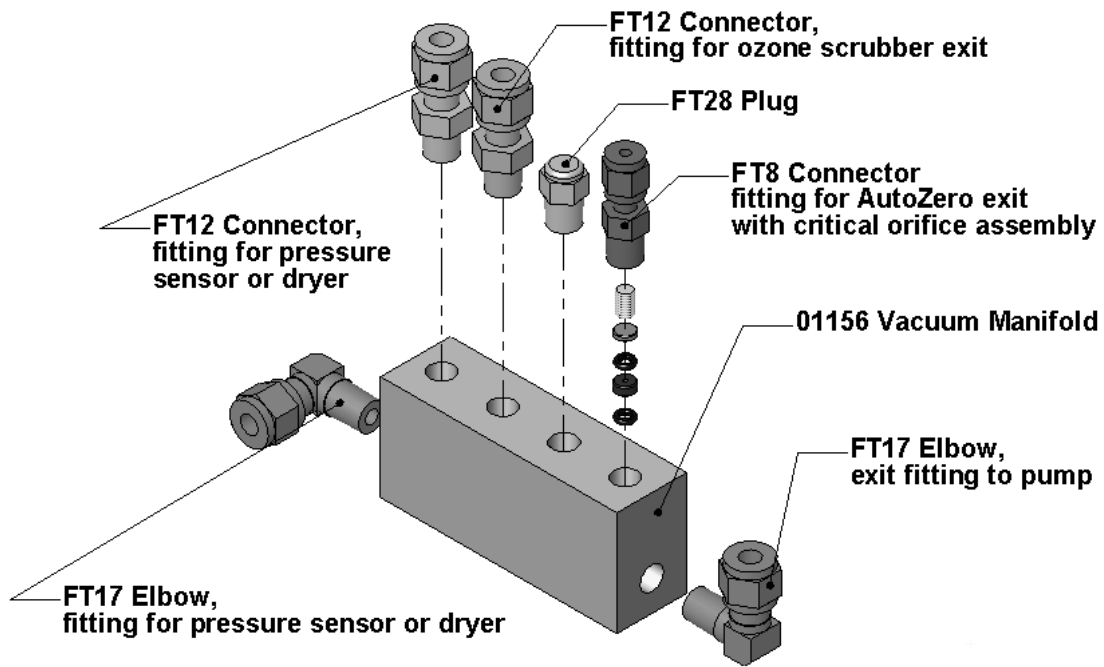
EXHAUST VACUUM MANIFOLD.
